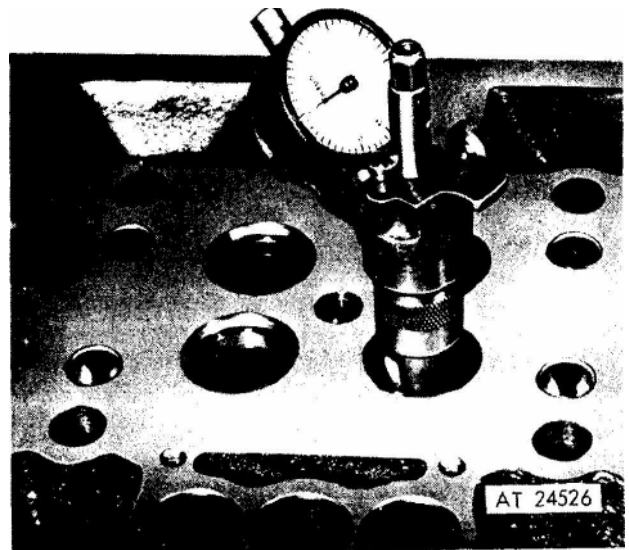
Checking relative concentricity of exhaust valve seat insert with relation to valve guide.
